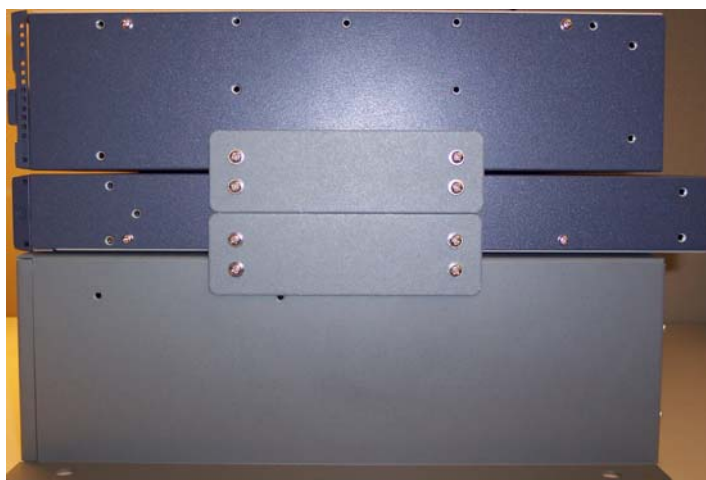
Install CHS2U JOINT BRACKET KIT
